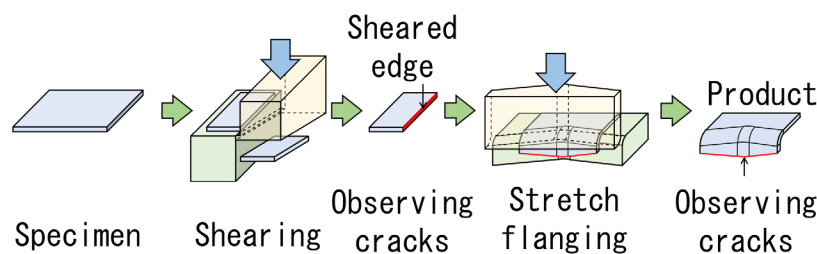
Method of measuring cracks in stretch flanging of sheared steel sheets.
